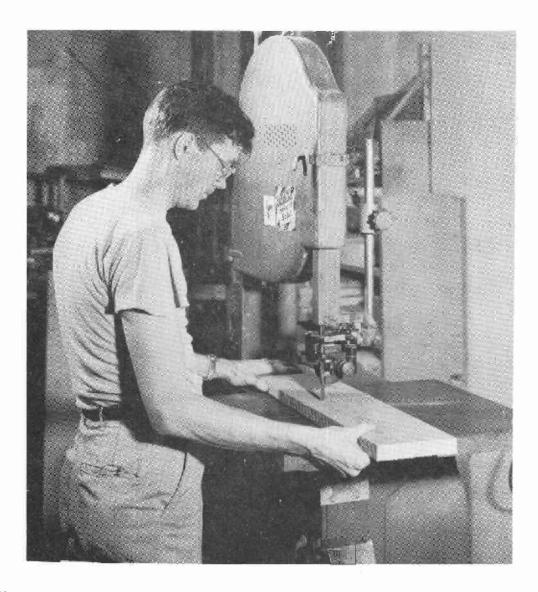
Band saw being used to prepare kiln sample. A saw of this type is best suited for cutting case-hardening test specimens.
